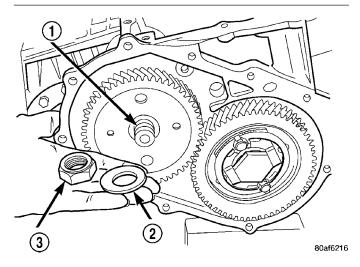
Transfer Shaft Gear Nut and Coned Washer
